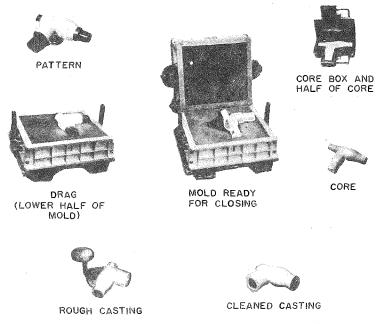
Elements in making a casting. Top half of mold, cope; bottom half, drag.
